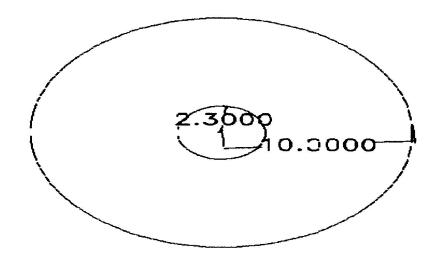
2D design of the rotating disc of the Polishing Machine of radius 10cm
